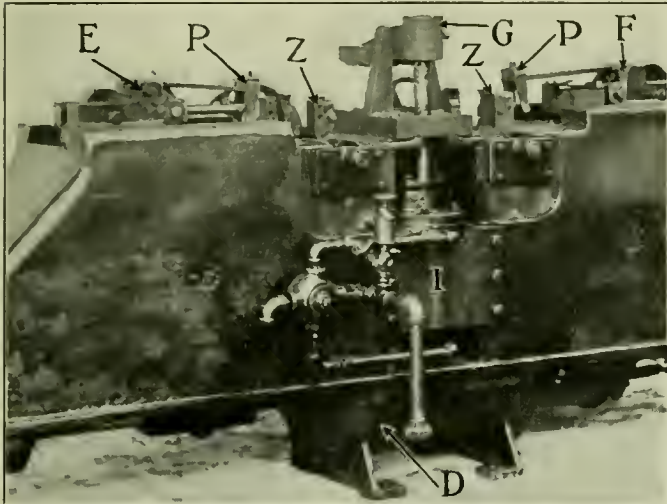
Rear View Showing Cylinder Which Operates Hose Clamping Head
